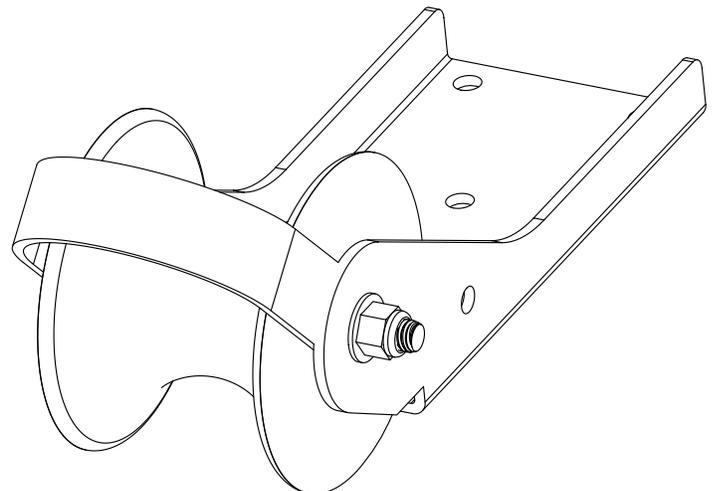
COMPLETELY ASSEMBLED BOW ROLLER
